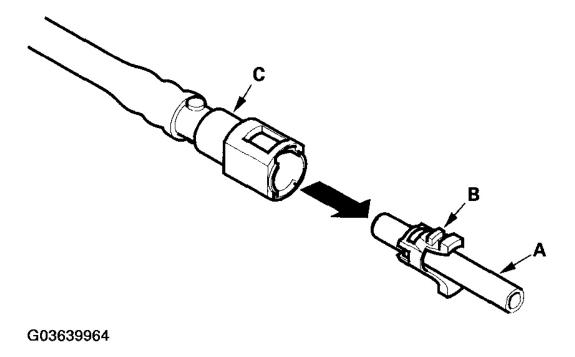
Aligning Quick-Connect Fittings With Line (Reconnection To Existing Retainer) Courtesy of AMERICAN HONDA MOTOR CO., INC.
